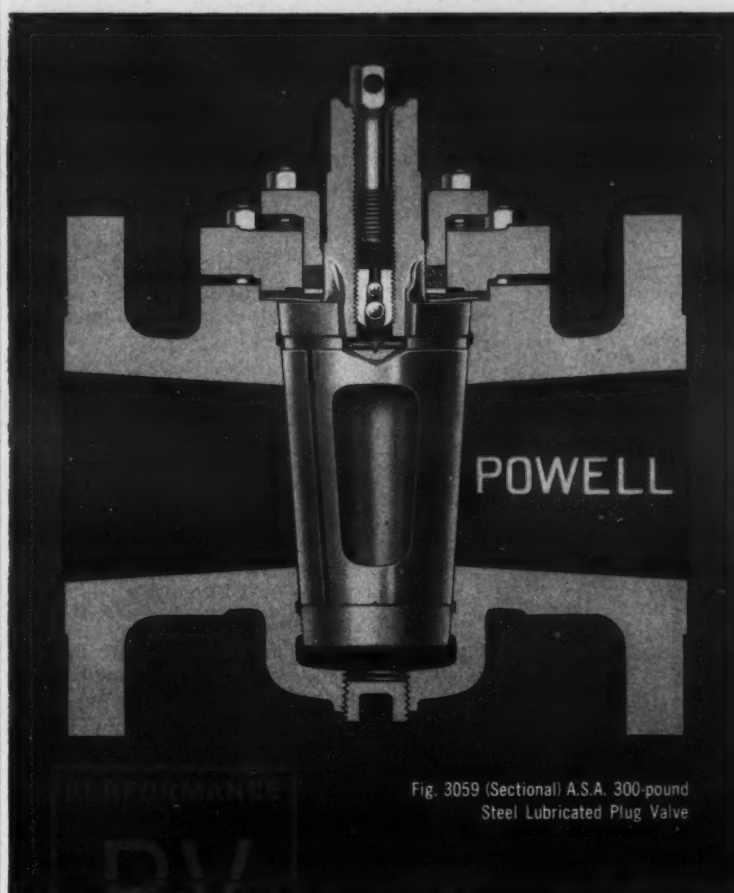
(Sectional) A.S.A. 300-pound Steel Lubricated Plug Valve
